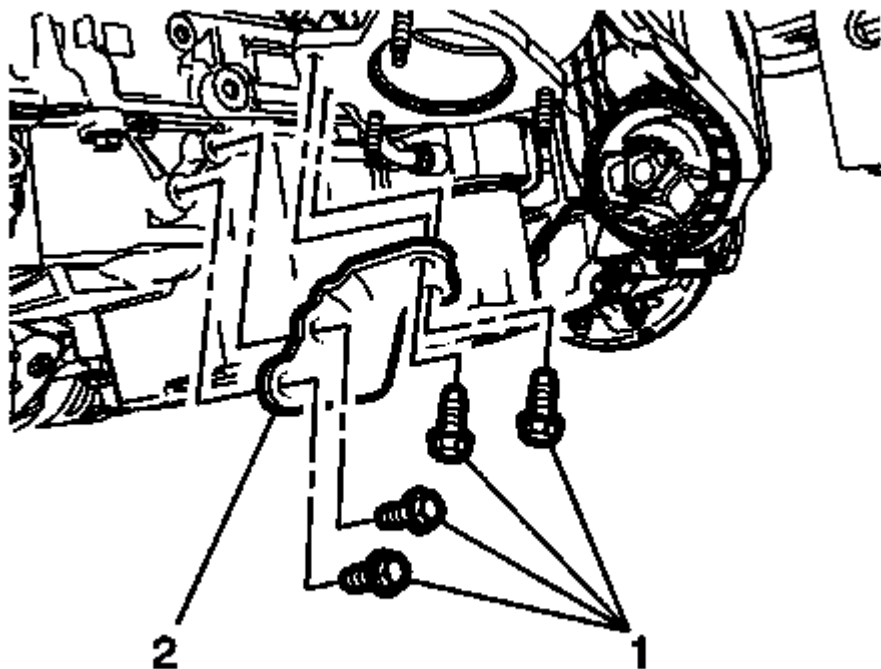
Catalytic Converter Lower Brace & Fasteners
